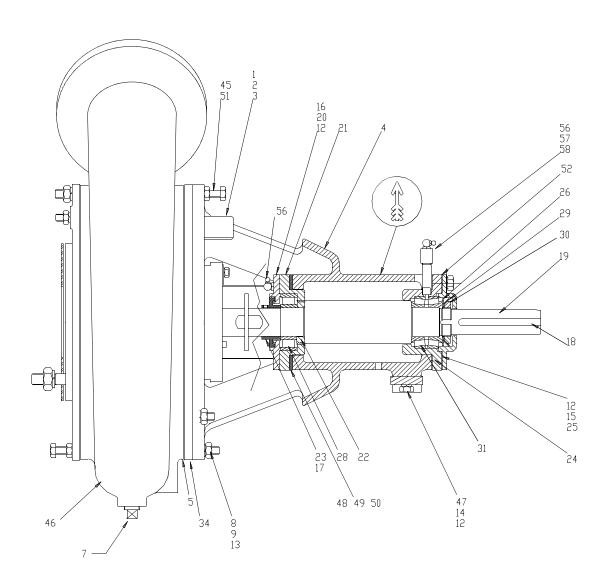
Bearing/Shaft Assembly - WP150 & GP100M
